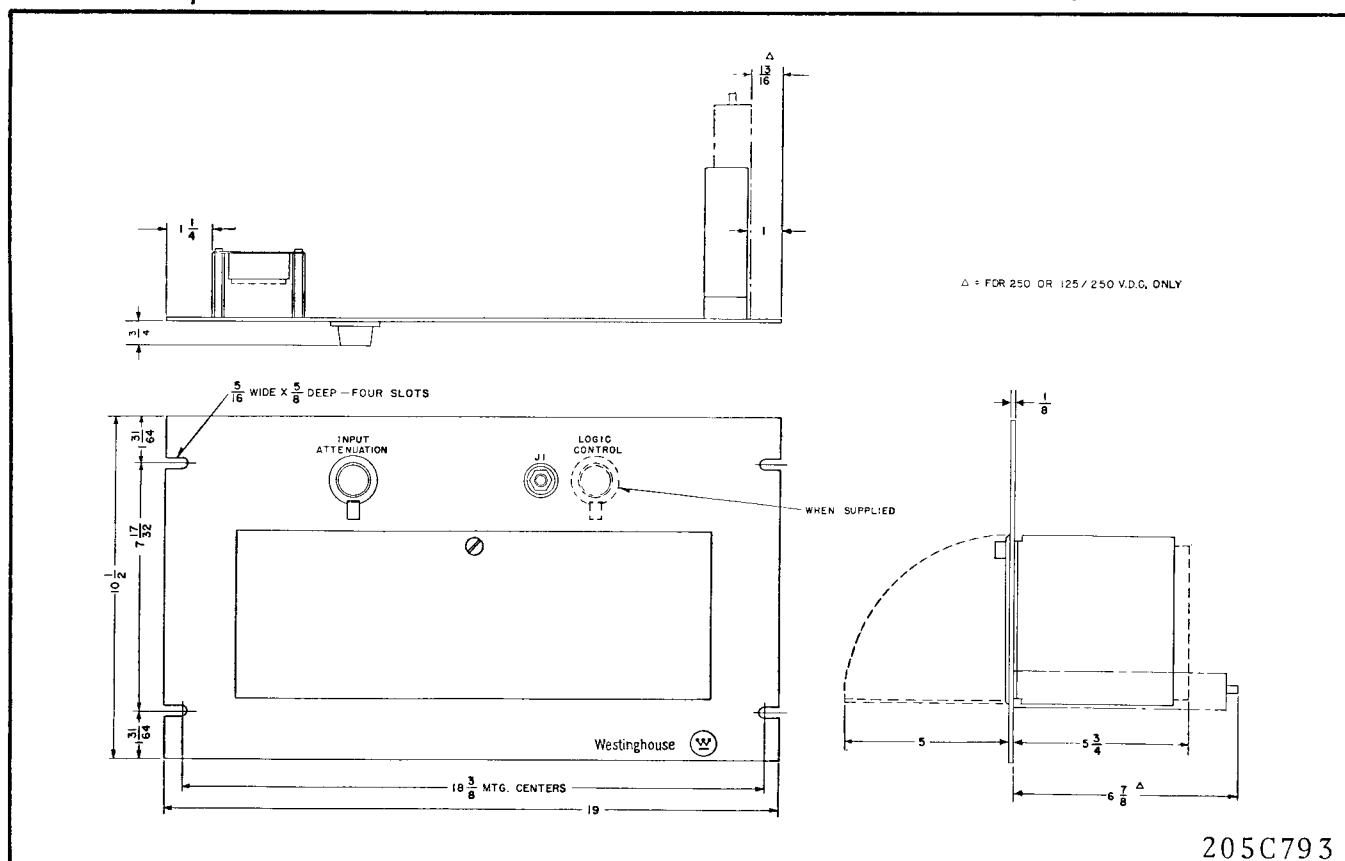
Outline and drilling plan for the type TCF receiver assembly.
